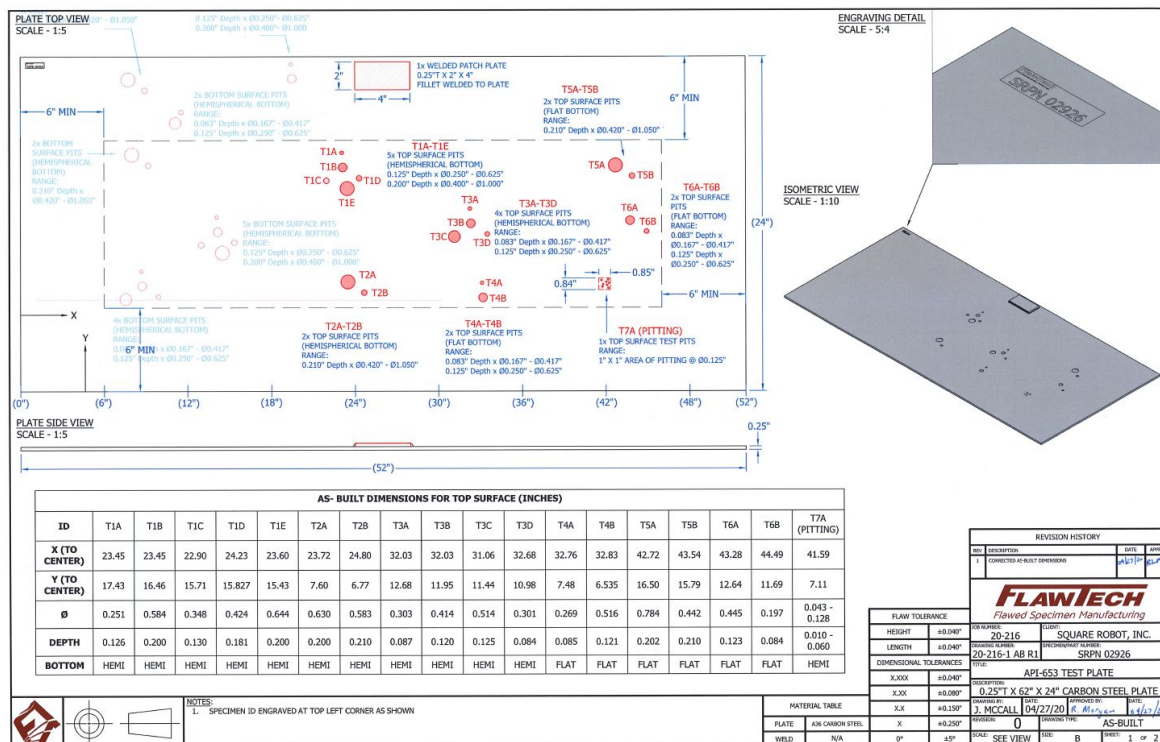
20-216-1 AB R1, API 653 Plate SRPN 02926 Inspected Defect Sizing, Product Side
